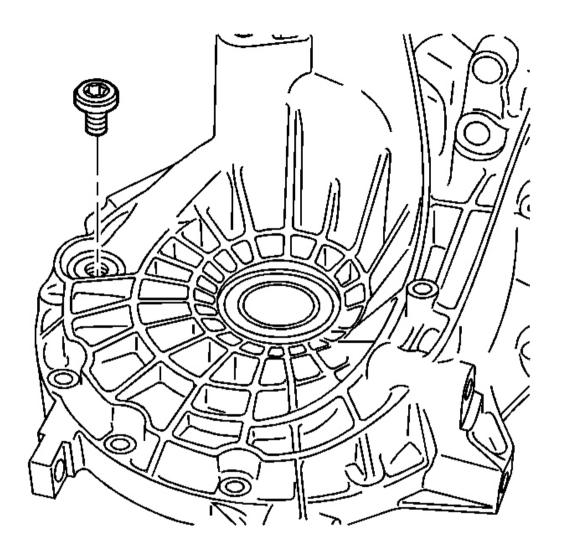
View Of Transmission Drain Plug Courtesy of GENERAL MOTORS CORP.
